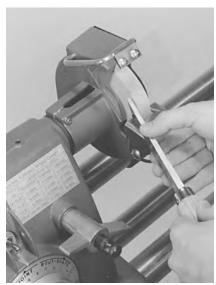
Position the tip up, and lay the right side bevel against the left side of the grinding wheel.
